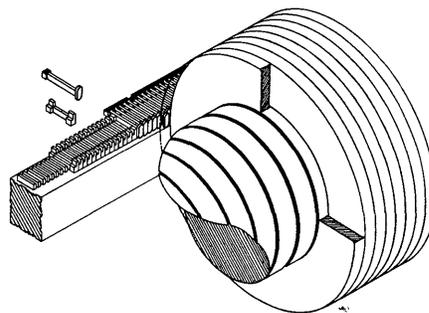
The shaft in which the typewheels are stacked is grooved so that a snap-ring can hold each pair of typewheels together. Nylon inserts provide bearing surface for the hammers
